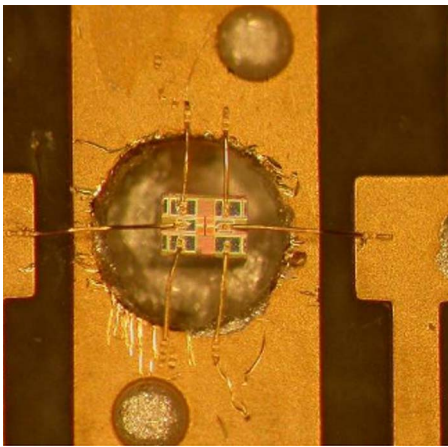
(Color online) Closeup of STM discrete transistor chip mounted in a 1.2 mm diameter plated-through via. The four top and bottom bond wires are for grounding the emitter while the horizontal bond wires are for base input and collector output. The bond wires are 17 μm diameter gold.
